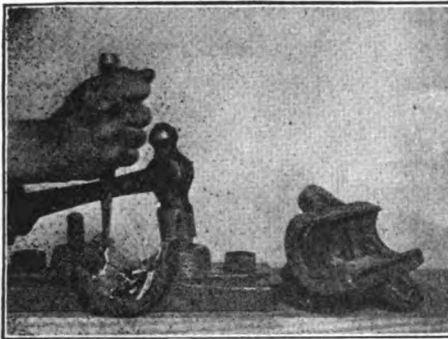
OLD BABBITT METAL IS REMOVED WITH A COLD CHISEL
